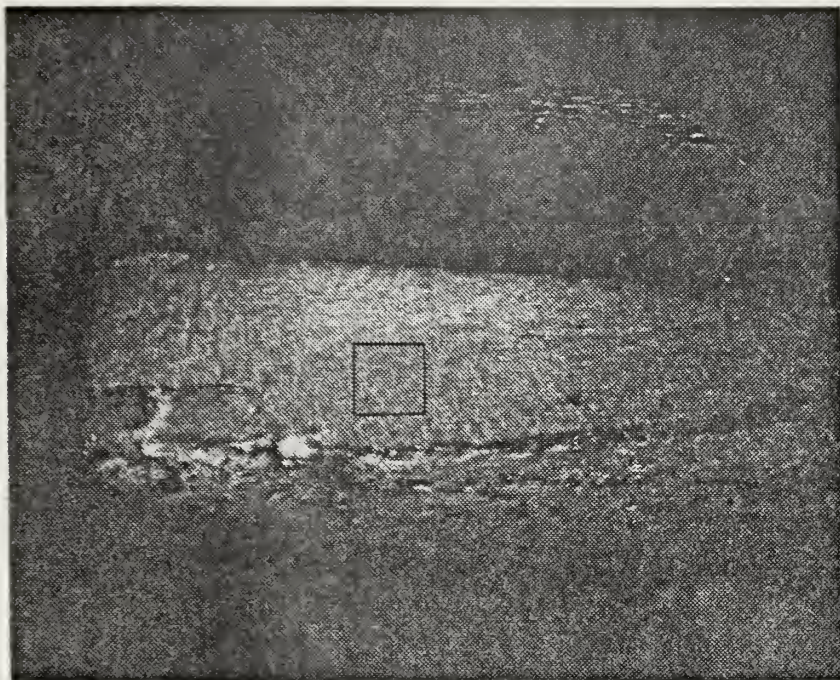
Macro-fractograph of a specimen AR-5-5 which was fractured after 342,800 cycles at 65 ksi, showing half moon shaped fatigue zone with one crack origin and fast fracture zone. X10.
